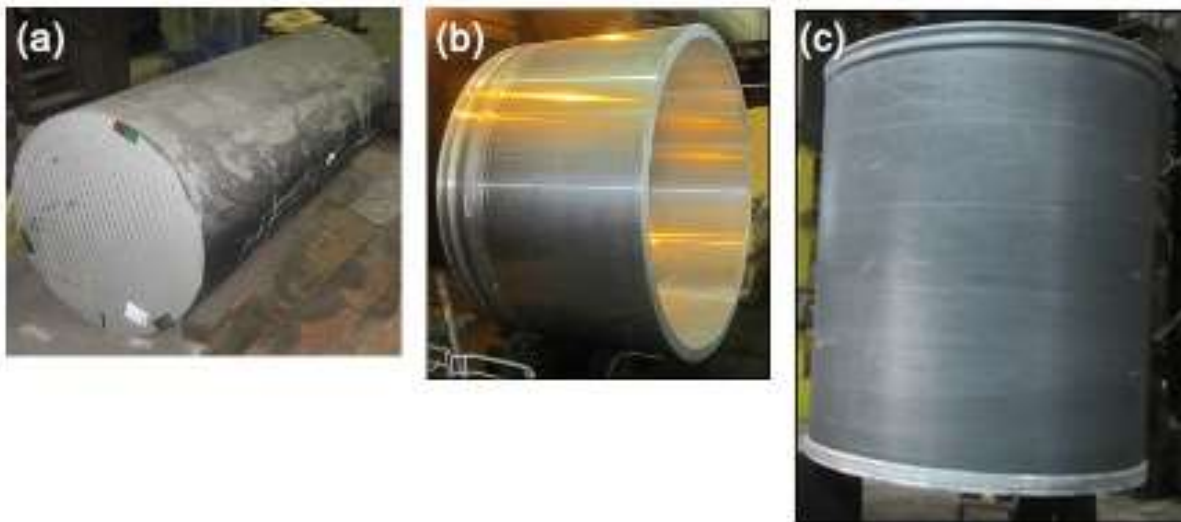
Forming sequence for seamless barrel fabrication; (a), cylindrical ingot; (b), ring-rolled and machined hollow cylinder; (c), 96.5 in. diameter flow-formed barrel.
